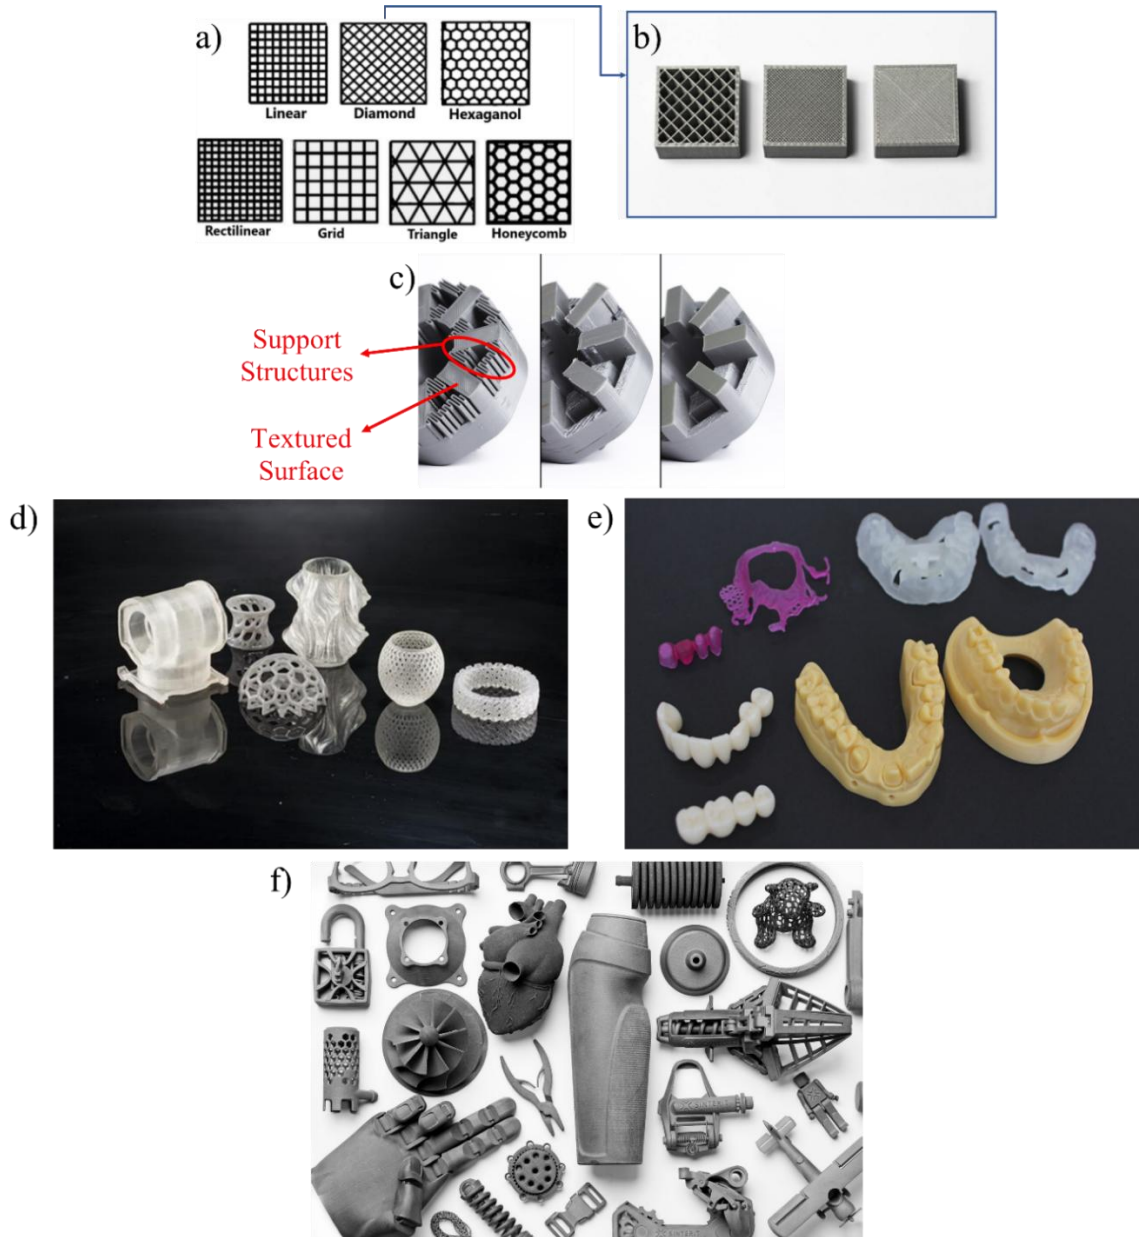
a) Examples of infill patterns for FDM-printed parts; b) The internal geometry of FDM prints with different fill density; c) An example of FDM-printed part [71]; d) Examples of SLA-printed parts [72]; e) Examples of DLP-printed parts [73]; f) Examples of SLS- printed parts [74].
